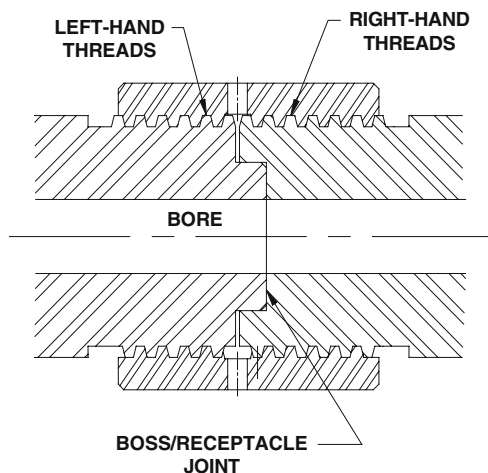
Right-hand/left-hand threaded coupler for joining light-gas gun components
